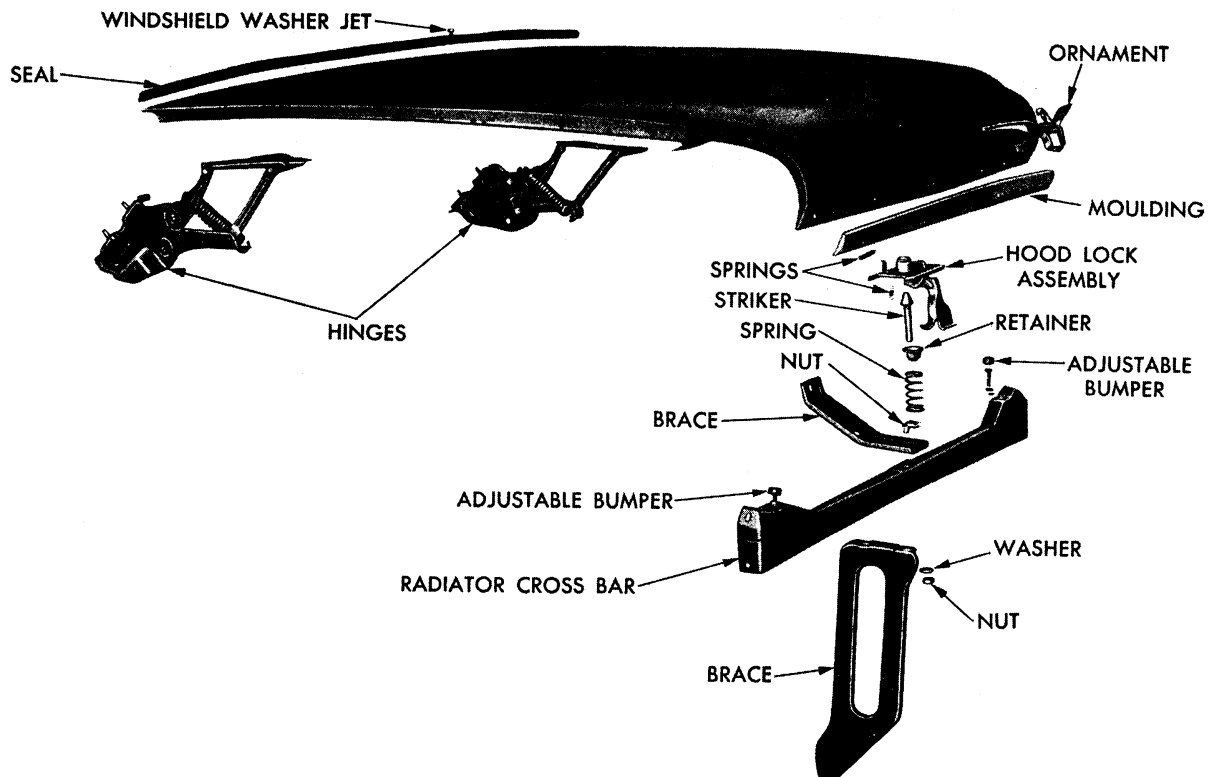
Hood (Disassembled View) (Chrysler Models)
